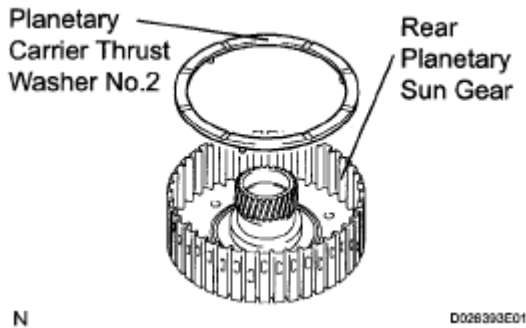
Identifying Planetary Carrier Thrust Washer And Rear Planetary Sun Gear
